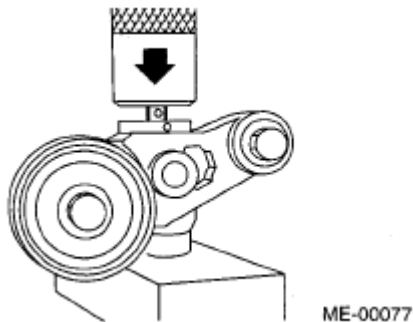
Attaching Automatic Belt Tension Adjuster Assembly
